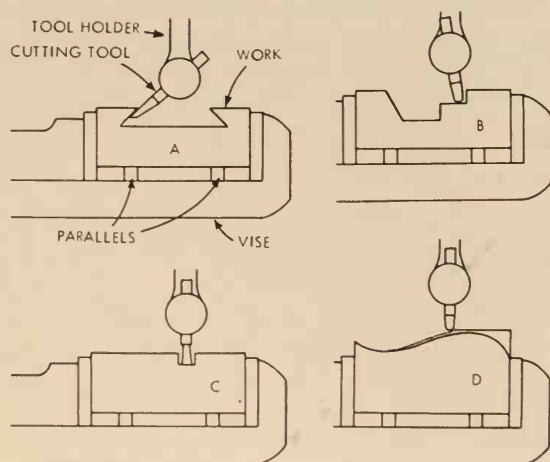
Cuts that can be made on a shaper: (A) Angular cuts; (B) Horizontal, Vertical, and Angular cuts; (C) Slotting cut; (D) Simple form cutting.
